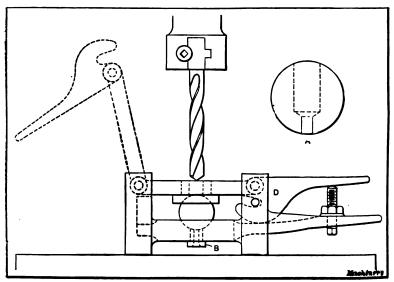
Box Jig for Drilling Ball shown enlarged at A
